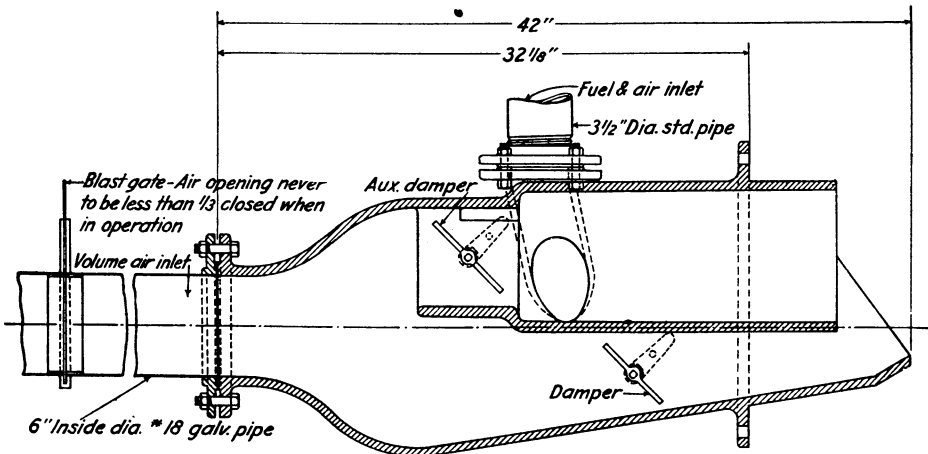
Assembly of horizontal burner, type B, Pulverized Fuel Equipment Co.
